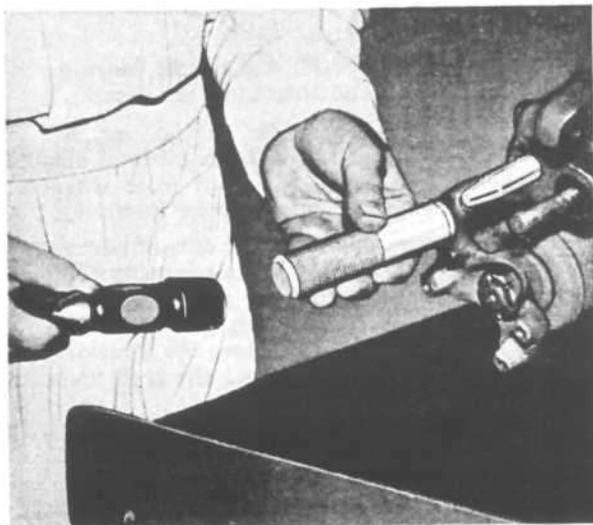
SHIFT ROD OIL SEAL INSTALLER
